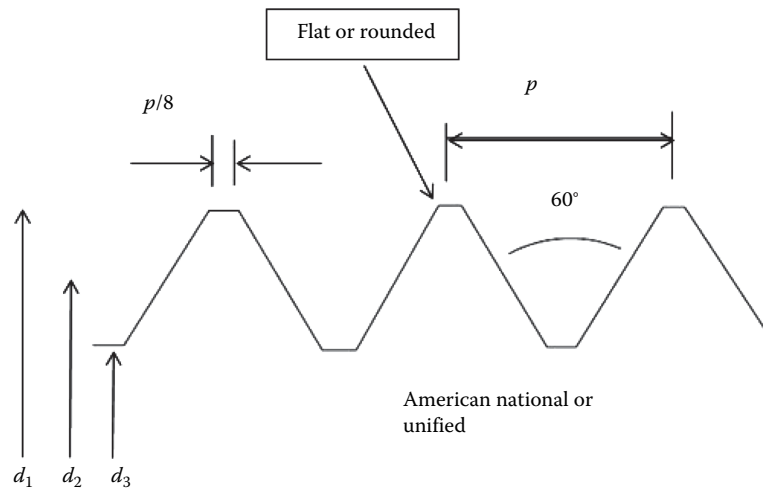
Thread illustrating American National or Unified and SI^[25]
